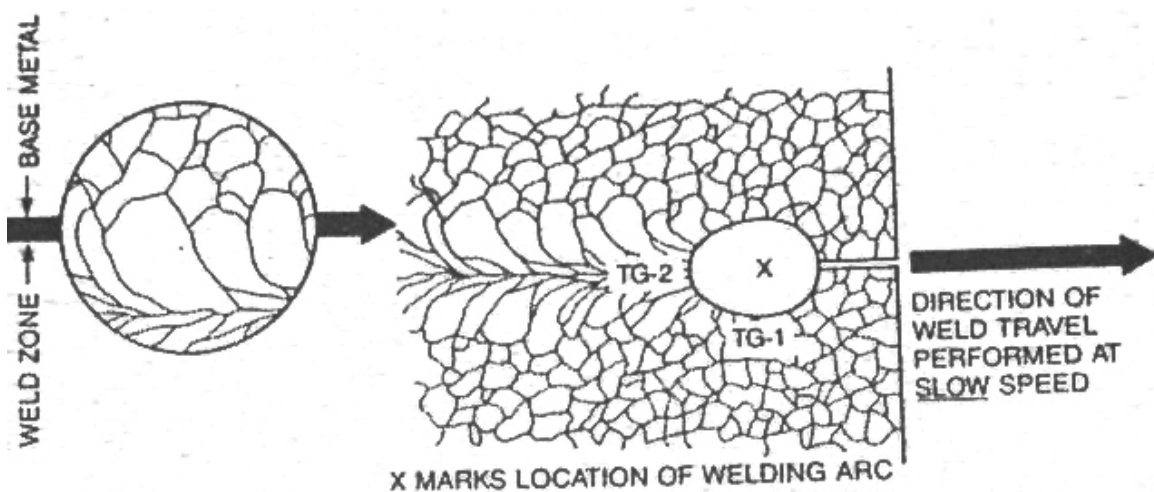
Welding at slow welding travel speed [22]
